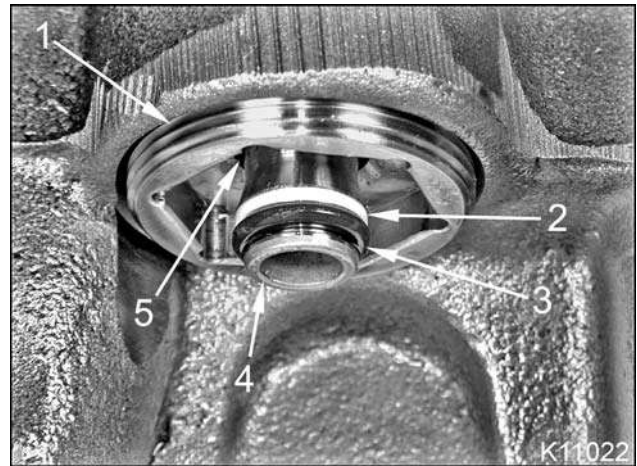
Injector oil inlet adapter installed in high-pressure oil rail
